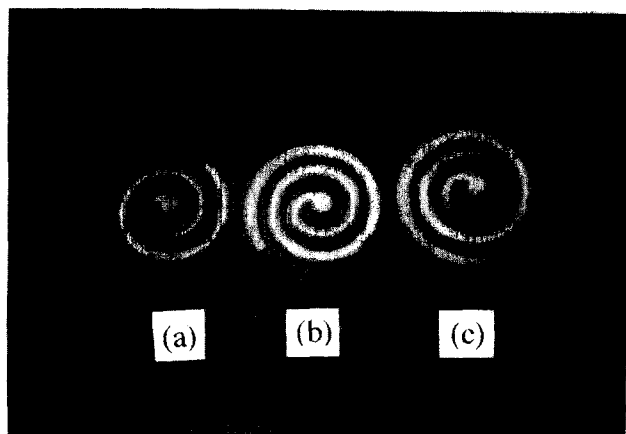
The appearance of molded parts with spiral flow shape at (a) 160°C, (b) 180°C and (c) 200°C.
